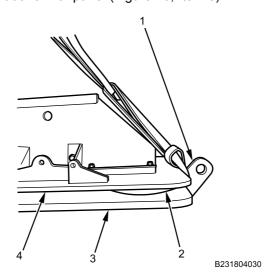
Loop Lifting Sling Around Door/Ramp Right Hinge.
